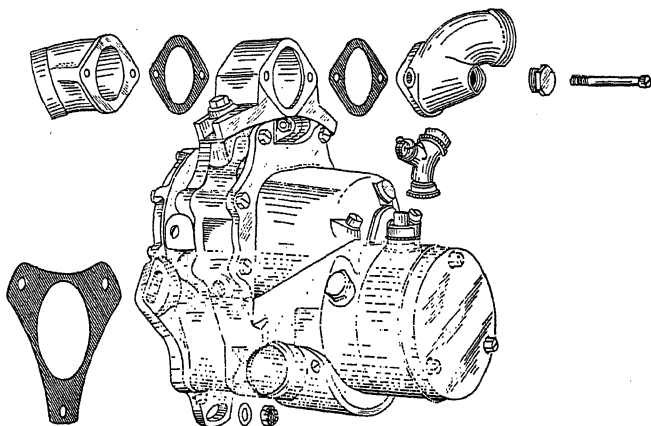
Flange-mounted magneto complete with mounting gasket and wire-shielding connectors.
